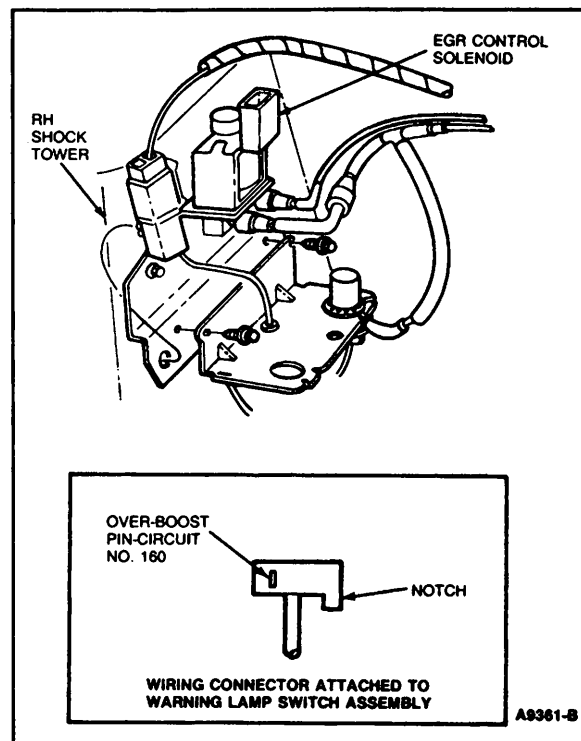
Manifold Pressure Warning Indicator Switch Assembly
